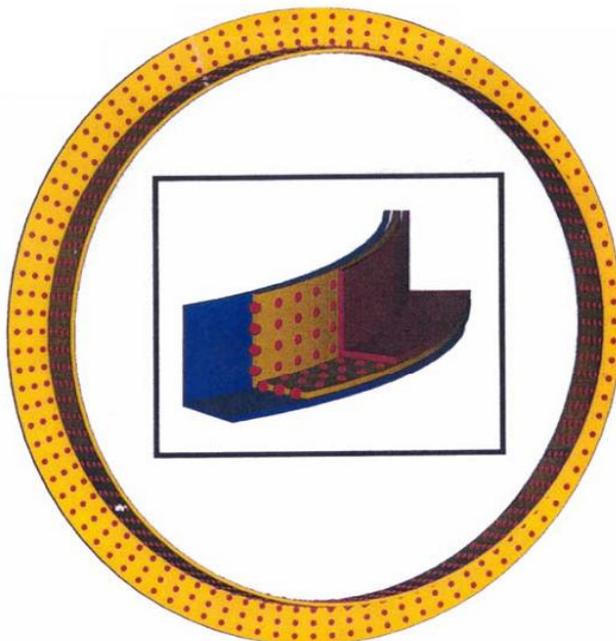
Possible configuration of exoskeletal engine thrust ball bearings
